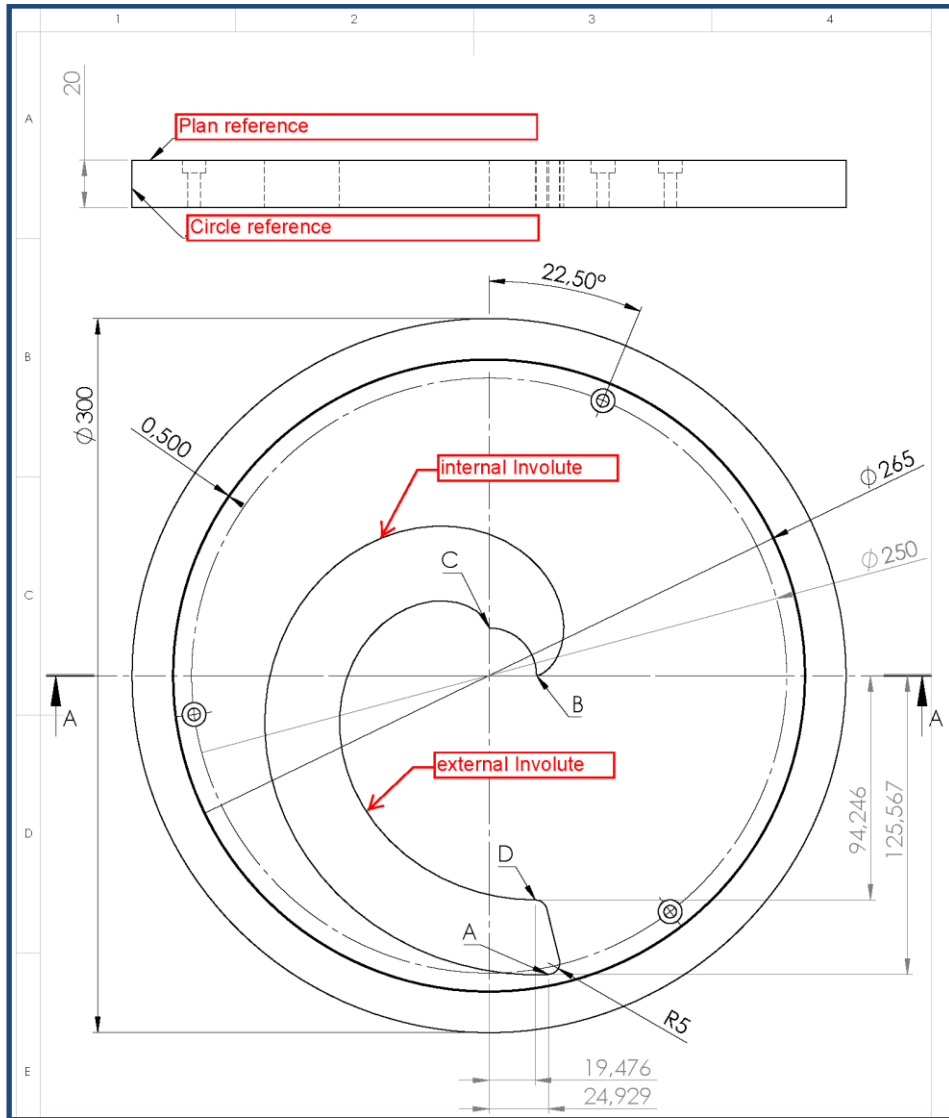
Technical drawing of the internal involute waviness scanning measurement standard
